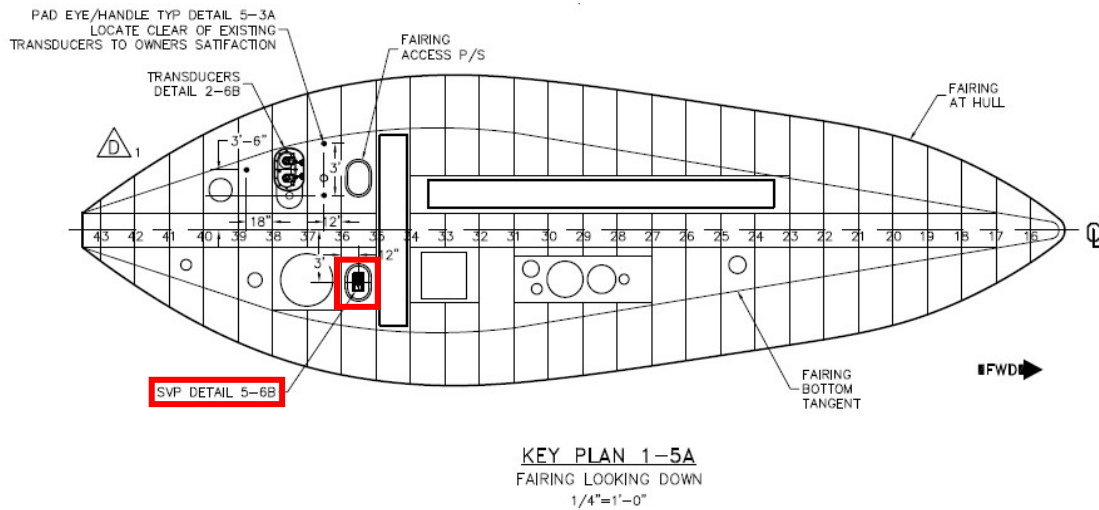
Line drawing showing the placement of the SVP probe on the transducer fairing.
